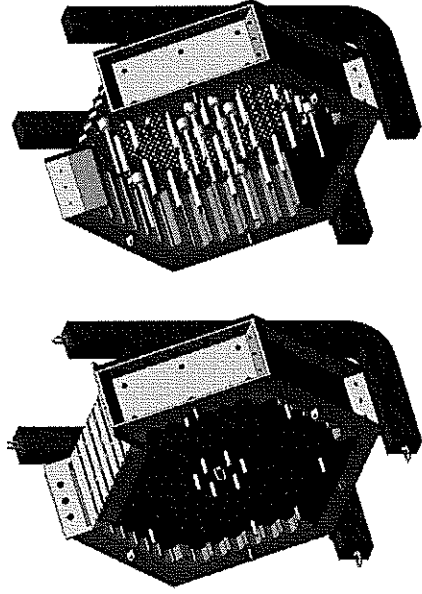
RENDER OF THE CORE MOLD SHOWN IN THE "415262 CORE BLOCK #10" CONFIGURATION: FULL ASSEMBLY (LEFT) AND WITH THE FRONT PLATE, TOP AND CAP REMOVED FOR CLARITY (RIGHT).
